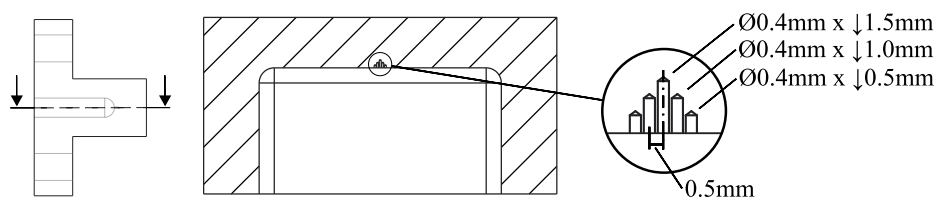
Sectional view of the test specimen showing the five micro-drilled holes inserted as micro-notches for a defined crack initiation.
